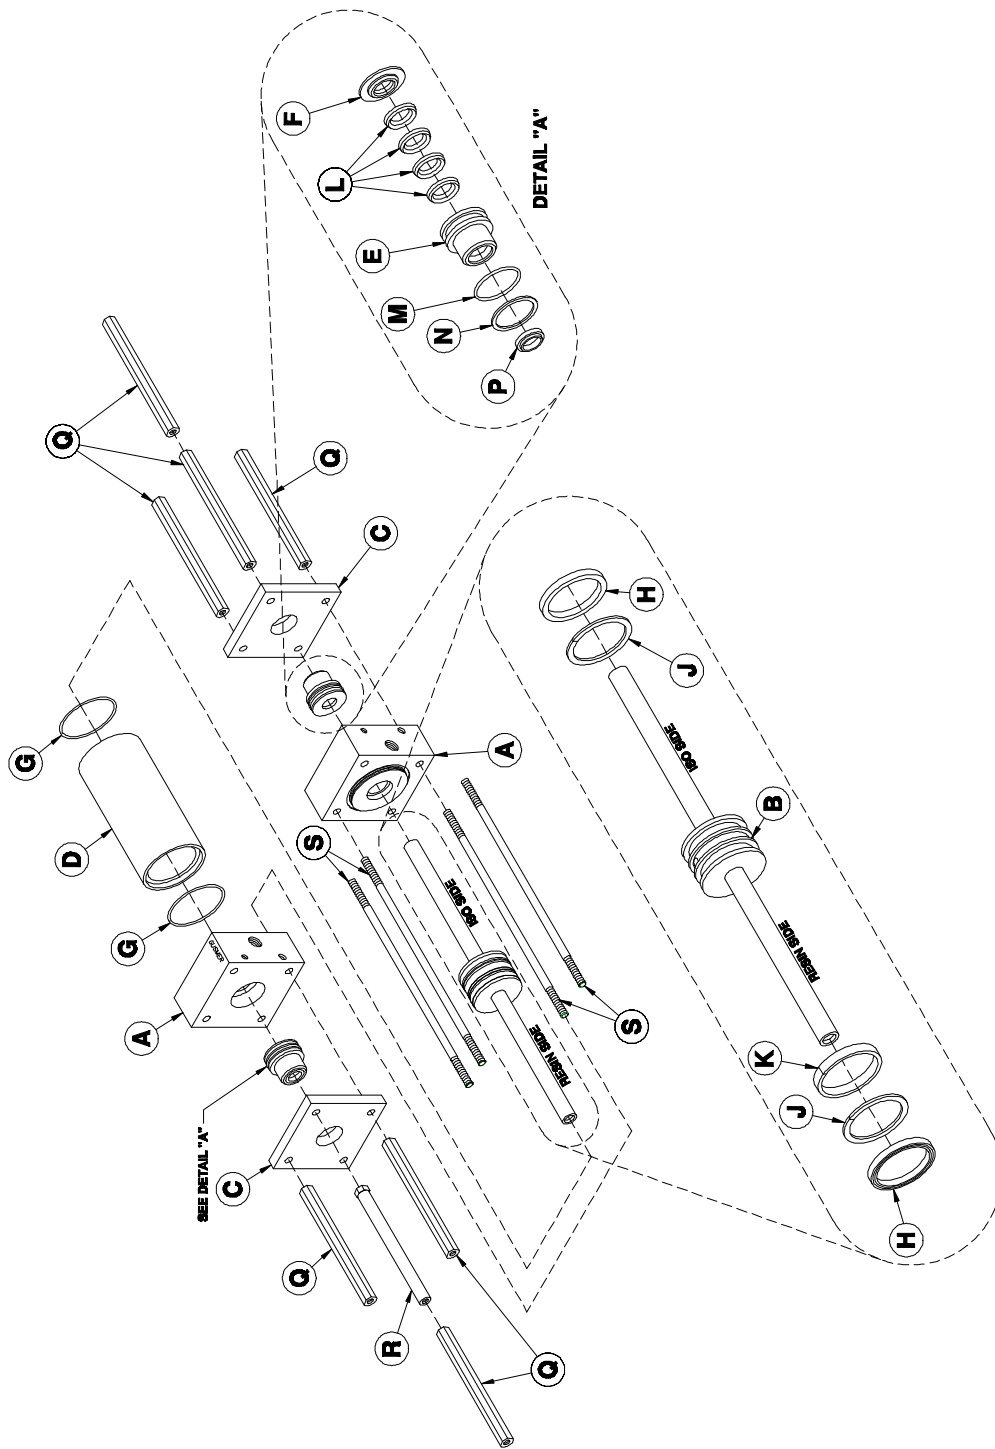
Hydraulic Cylinder with Spacer (Part No. 15511) Exploded View
